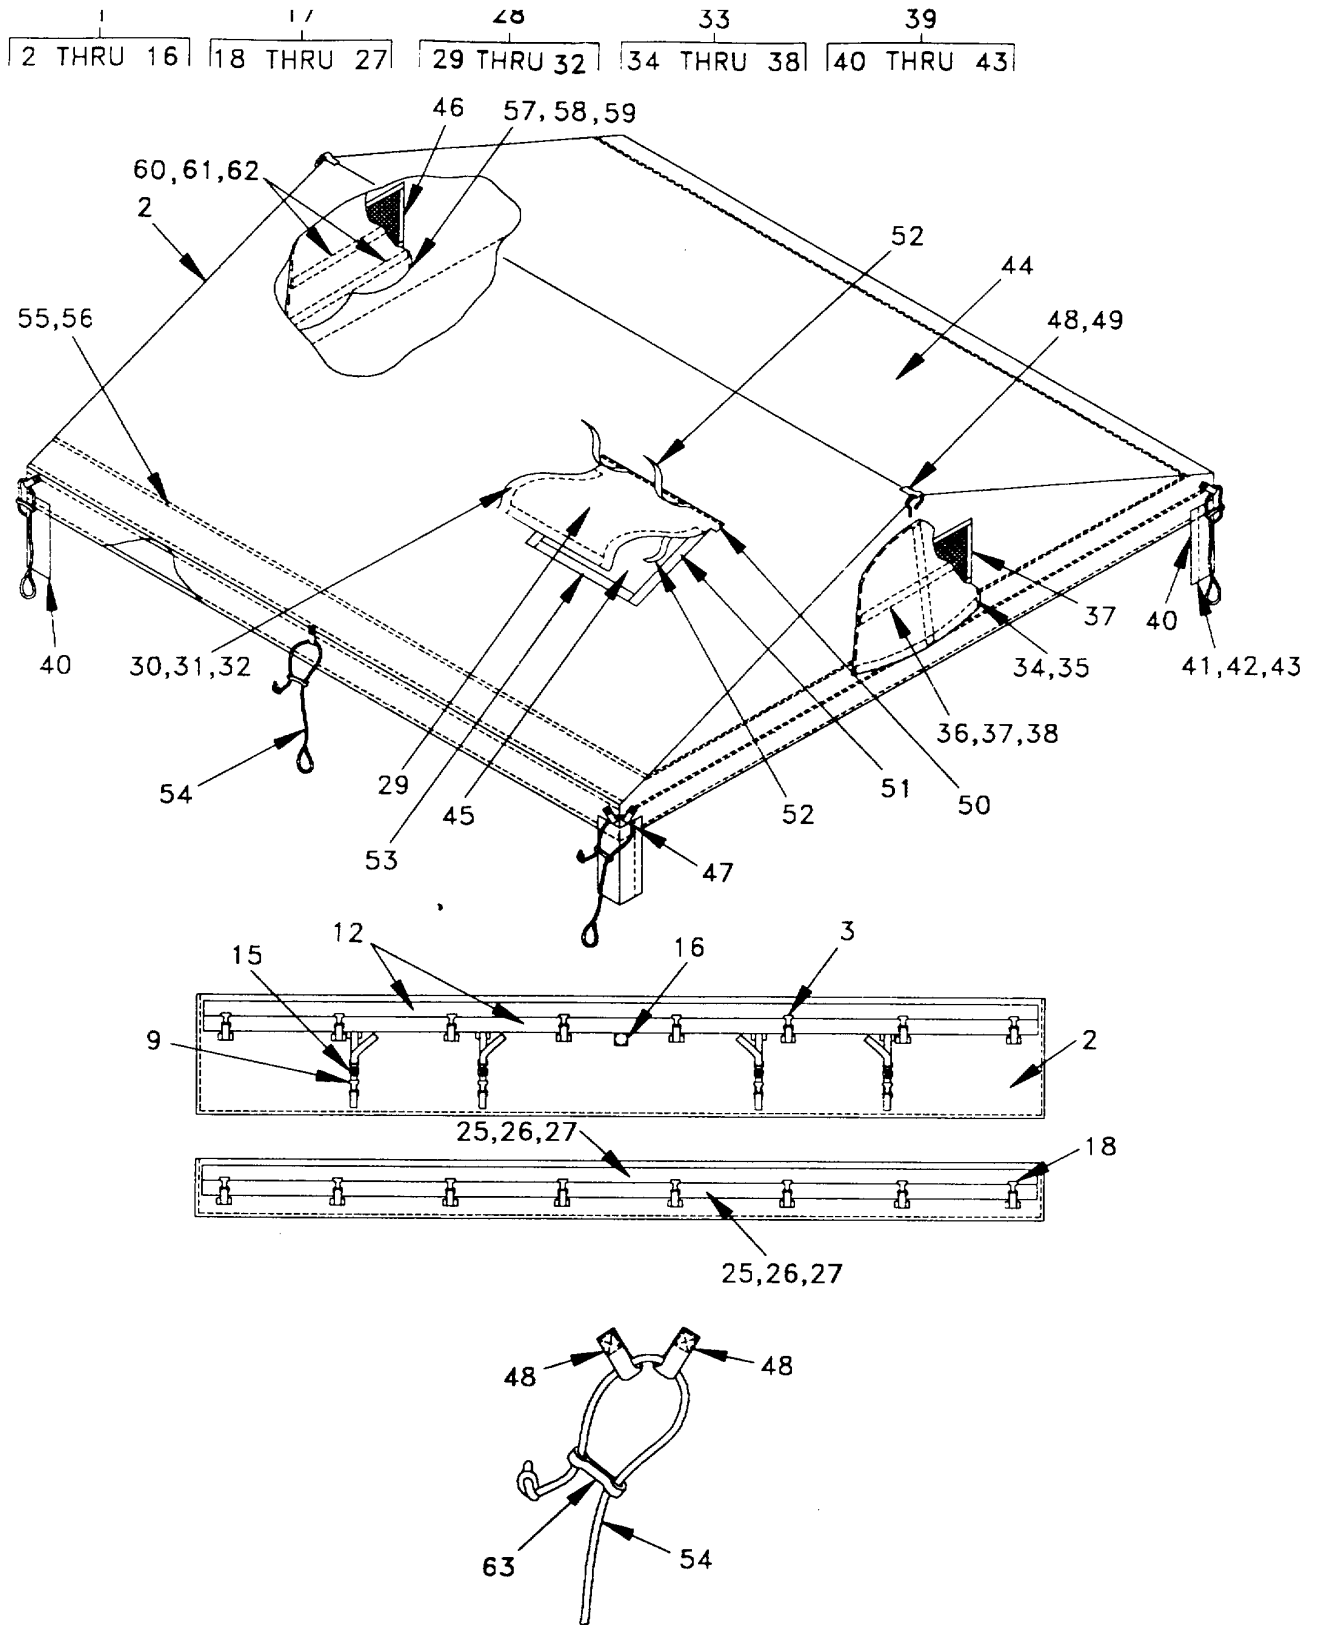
Roof Cap Assembly (Sheet 1 of 2)
